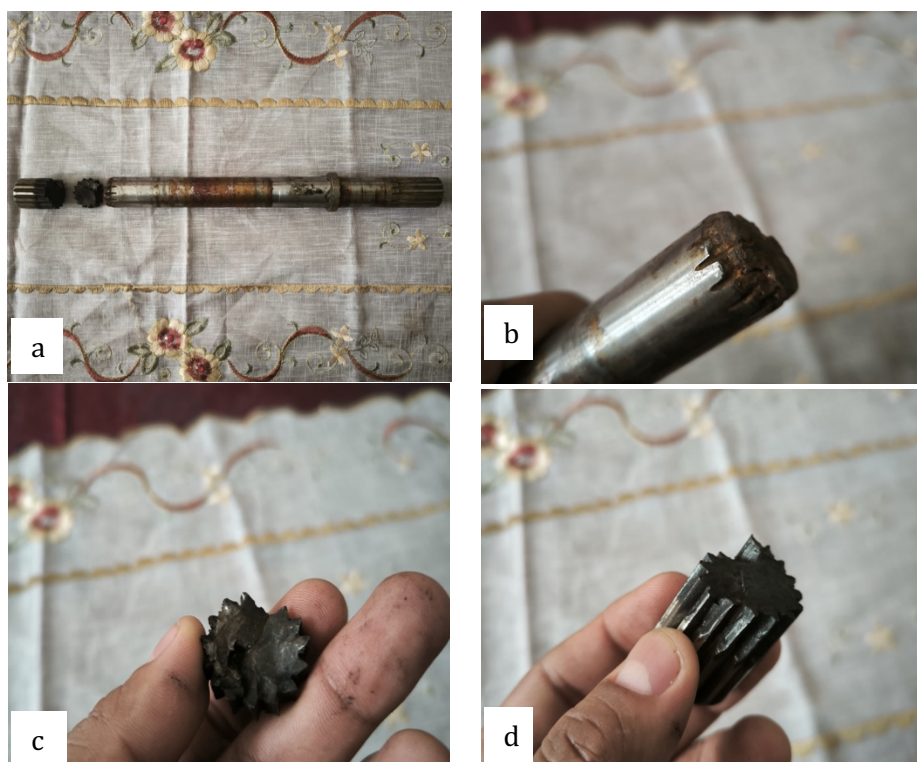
Failure Specimens: (a) HP Pump SWRO Test Specimen Experiencing Failure (b) Shaft as the Largest Part of the Fragment (c) Second Fragment on the Middle Side (d) Third Fragment as the End of the Shaft Coupled to the Pump Side
